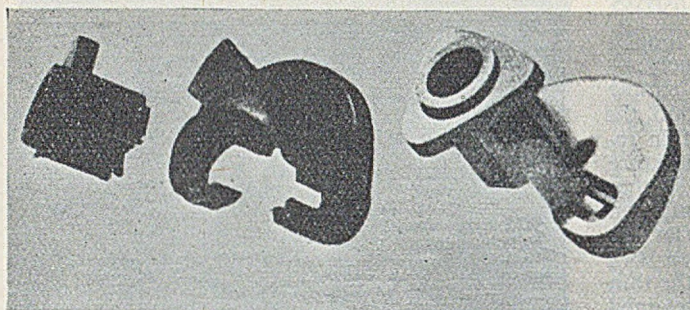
Two-part Wax Pattern (left), ready for Investment Moulding, and the Finished Casting.
